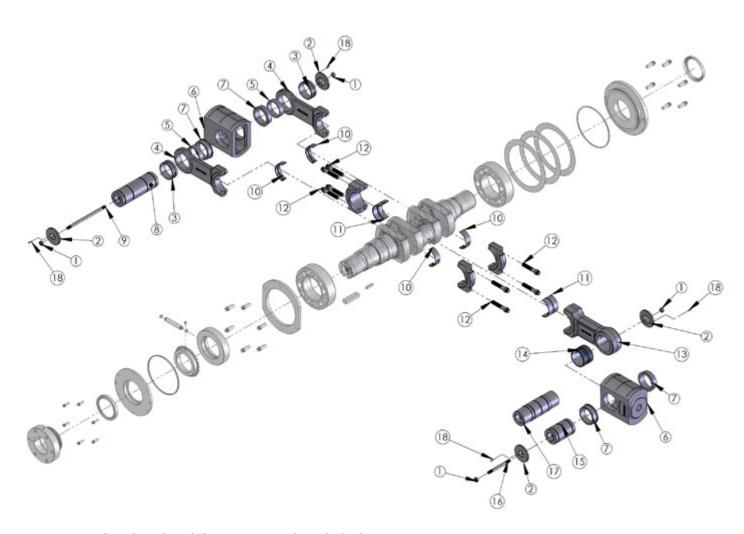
Crosshead and Connecting Rod Exploded View
